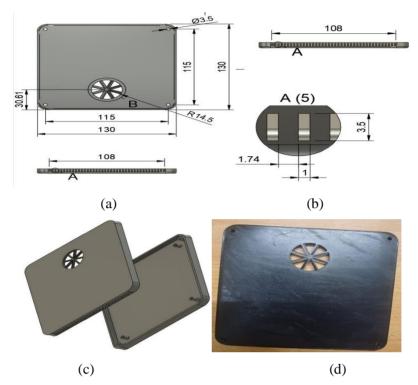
Enclosure (a) Dimensions (b) Thickness (c) Design (d) Fabricated
